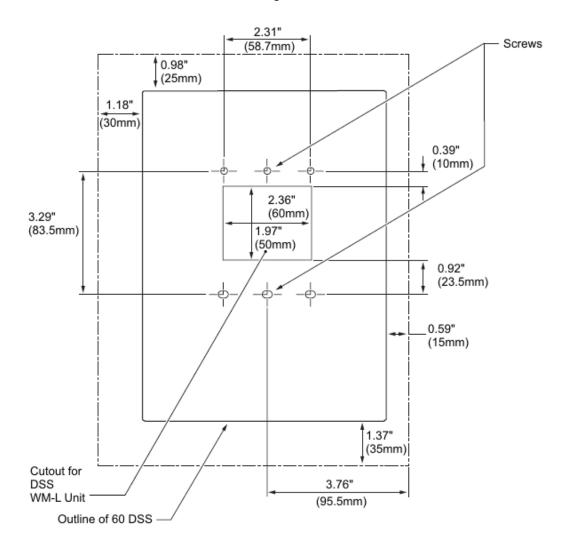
Wall Mount Spacing Guide (DSS WM-L UNIT)
